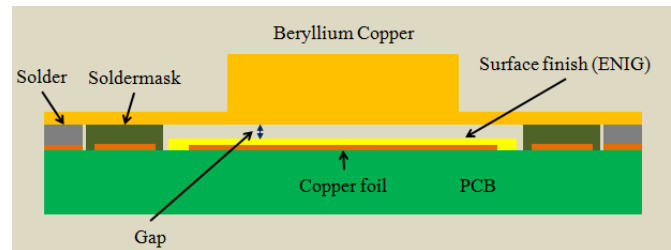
Side view of a single force sensing unit. The copper beryllium plate rests on the solder mask layer of the PCB. The gap is according to the difference in thickness between the solder mask and the surface finish (ENIG) layer.
